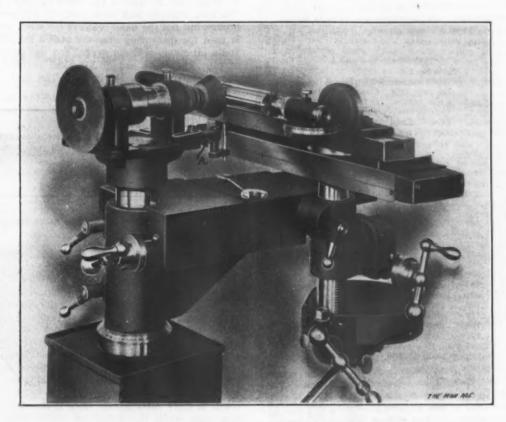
Showing Tooth Rest Held on Emery Wheel Head.
